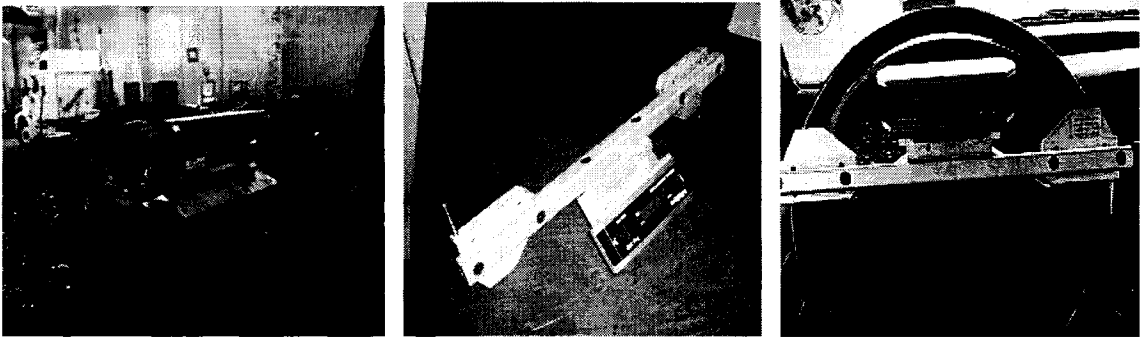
Steering Wheel Alignment Fixture (5000 & NGV)
